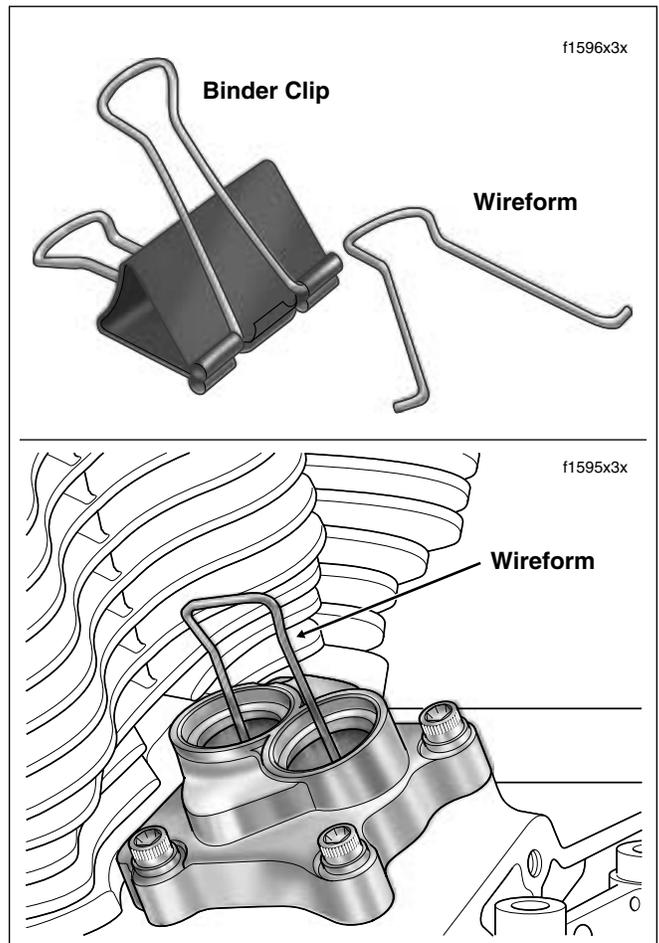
Fashion Tool to Hold Hydraulic Lifters
